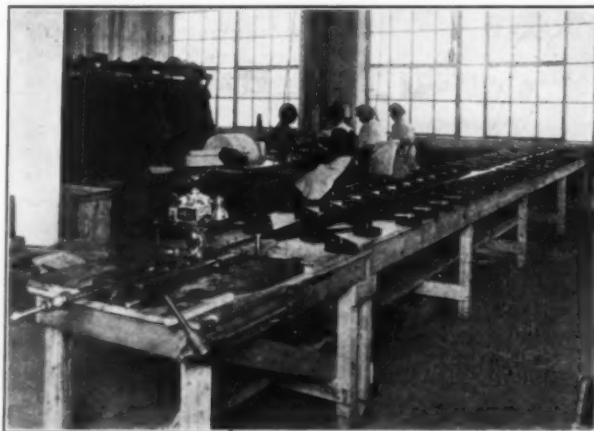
AUTOMATIC MACHINE FOR CUTTING ELASTIC HARNESS TAPE.
